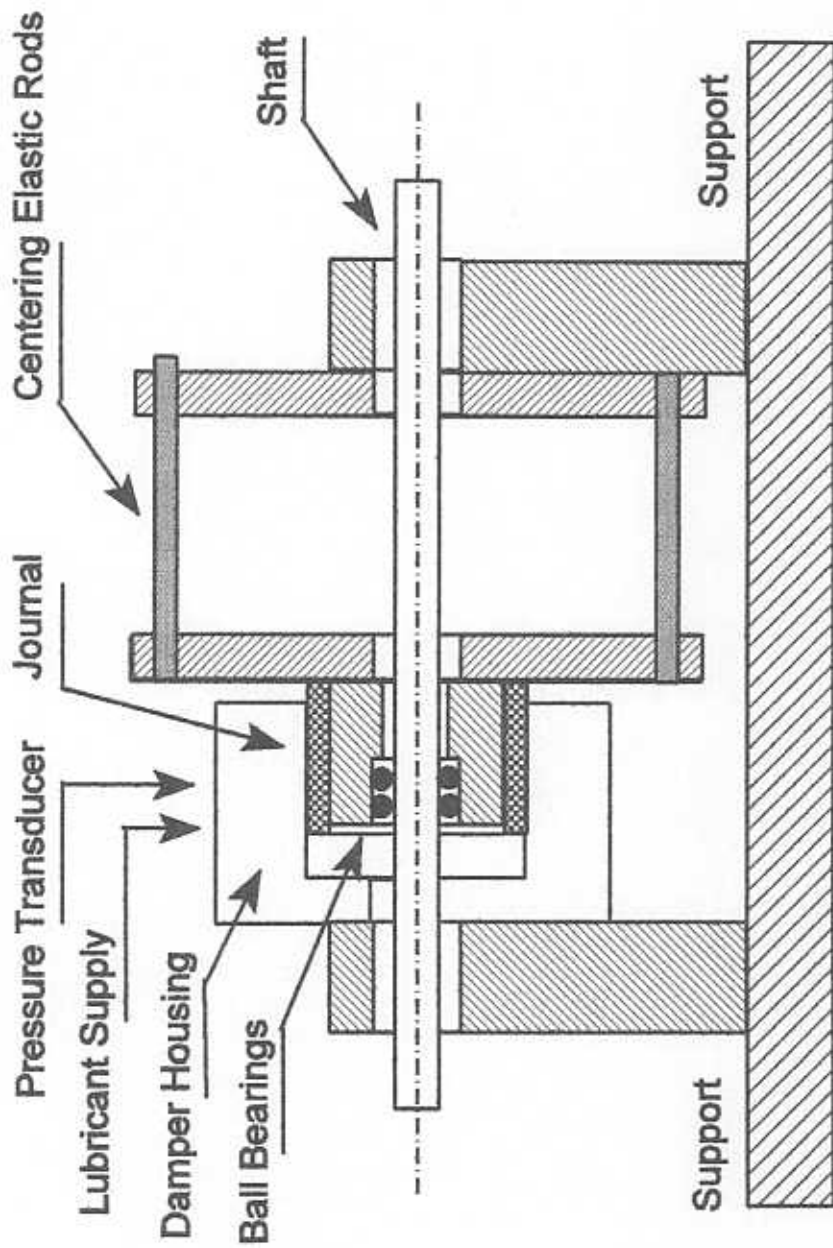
Squeeze Film Damper and Squirrel Cage Assembly
